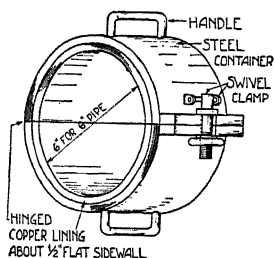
Copper back-up clamp for welding box end.
